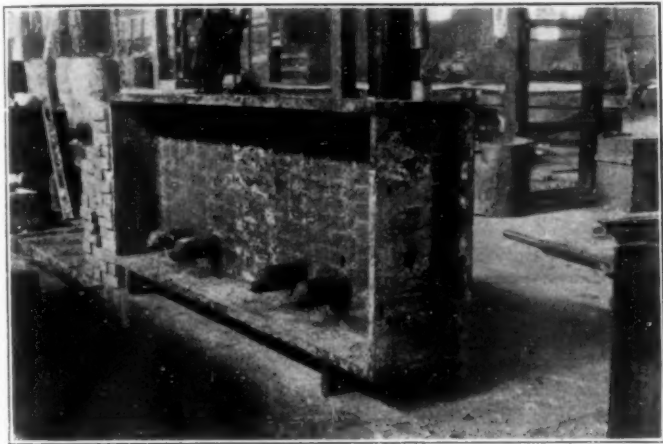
A SECTION OF THE FURNACE CASING WITH BURNERS INSTALLED.
